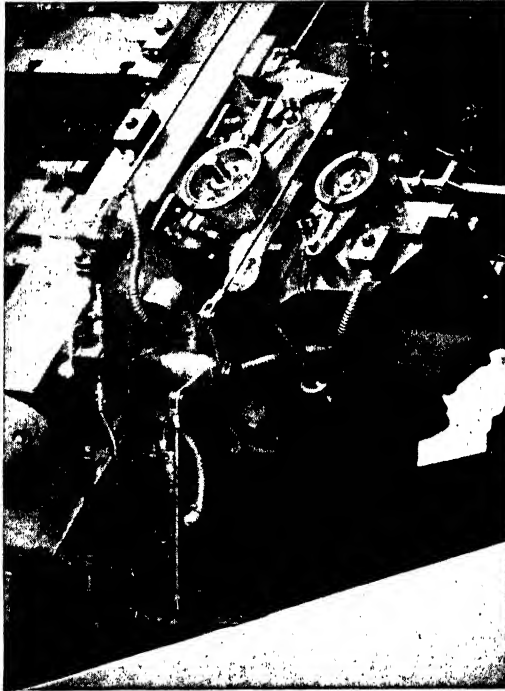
Solenoid control on a “high-production press” with four remote-control push buttons and a buckle detection limit switch to safeguard a \$6000 compound die.
